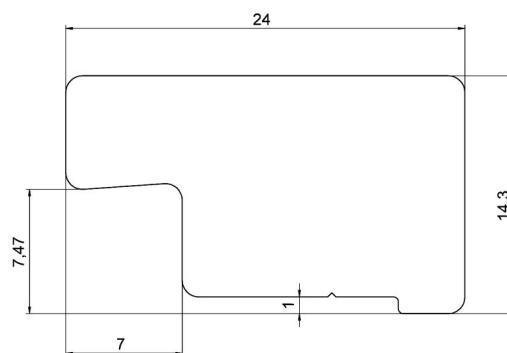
Dimensional Drawing of the Clamping Profile / Clamping Element
